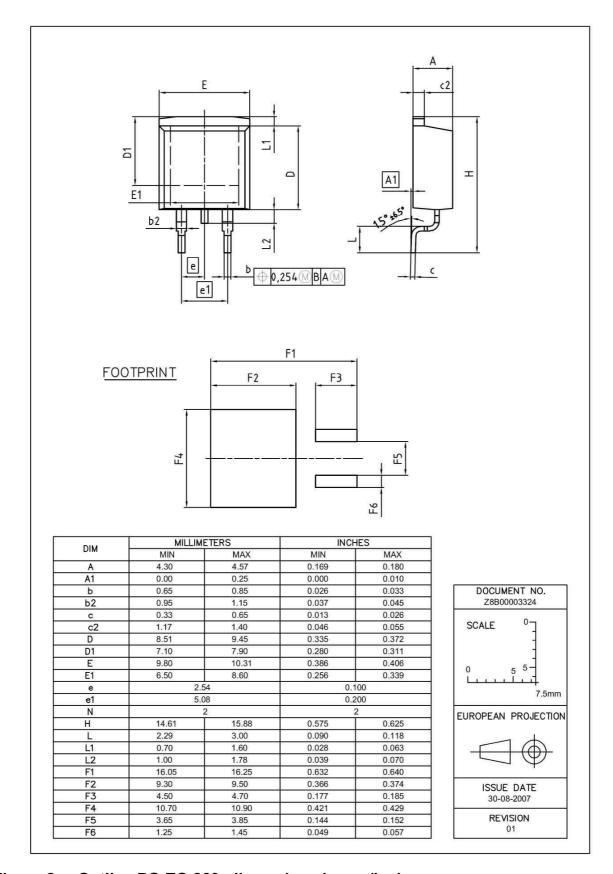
Outline PG-TO 263, dimensions in mm/inches
